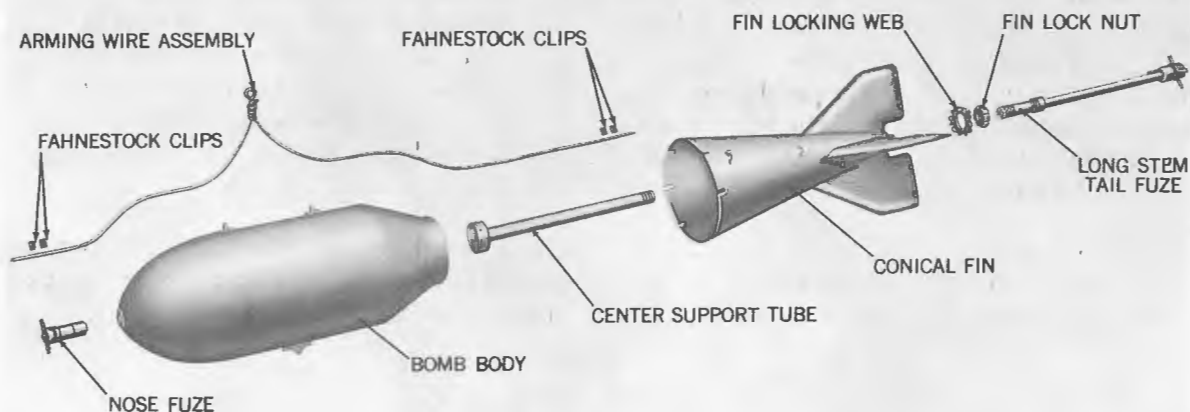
1000-lb GP Bomb AN-M65A1 with Fin Assembly M129, Exploded View.
